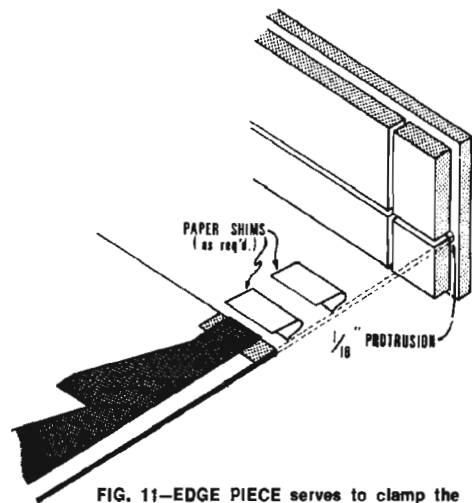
EDGE PIECE serves to clamp the control strip in place.
